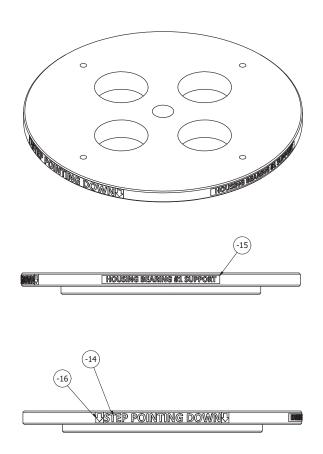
Upper Bearing Clamp Plate Stencil
